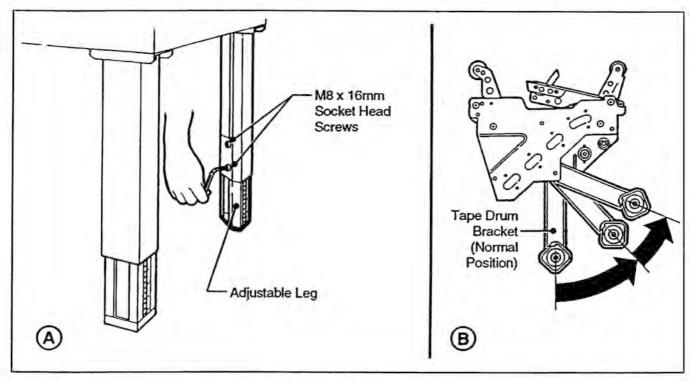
Machine Bed Height Adjustment and Lower Tape Drum Bracket Position
